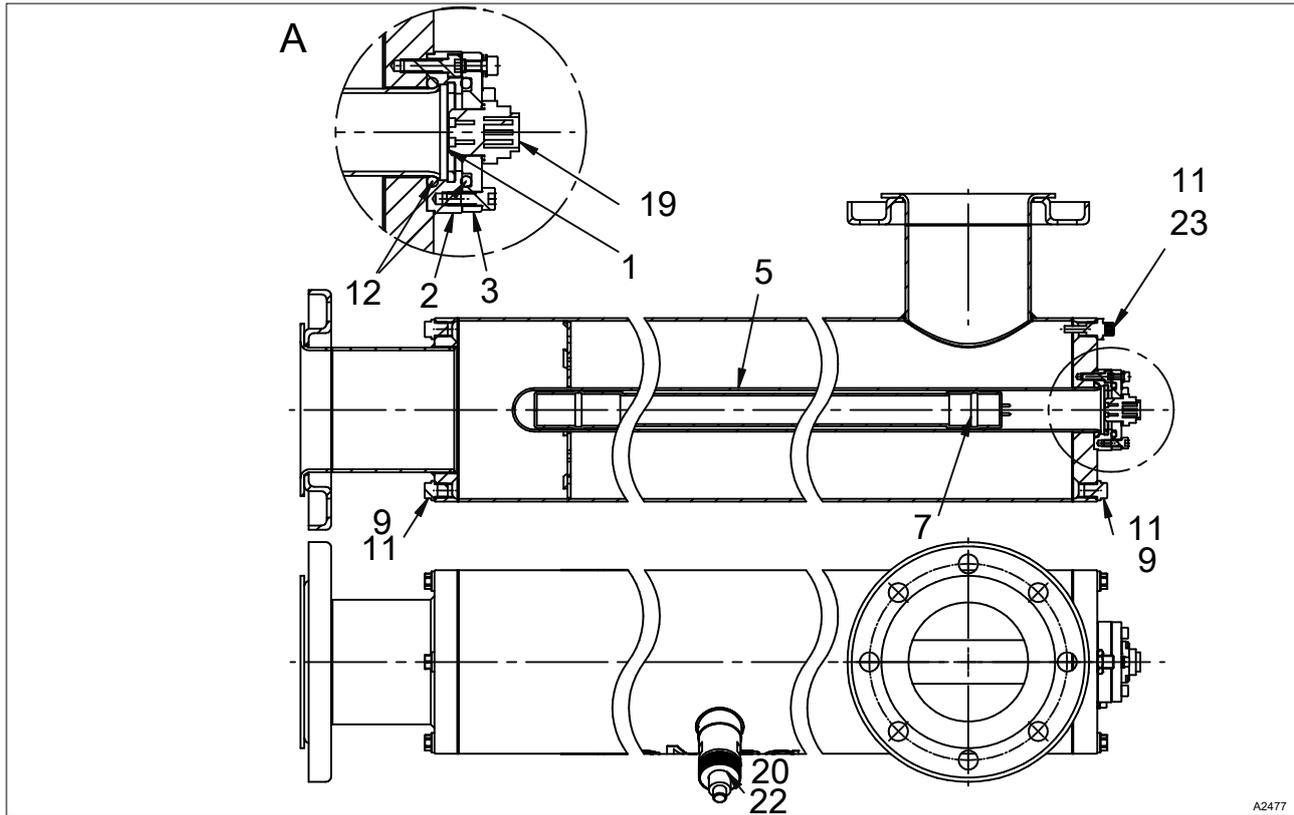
Spare parts, 350 W, single lamp system without wiper
